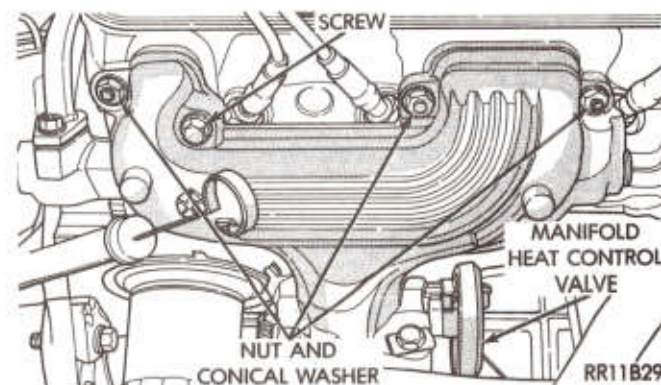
3.9L Exhaust Manifold Installation (Typical) (Right Manifold Shown)
